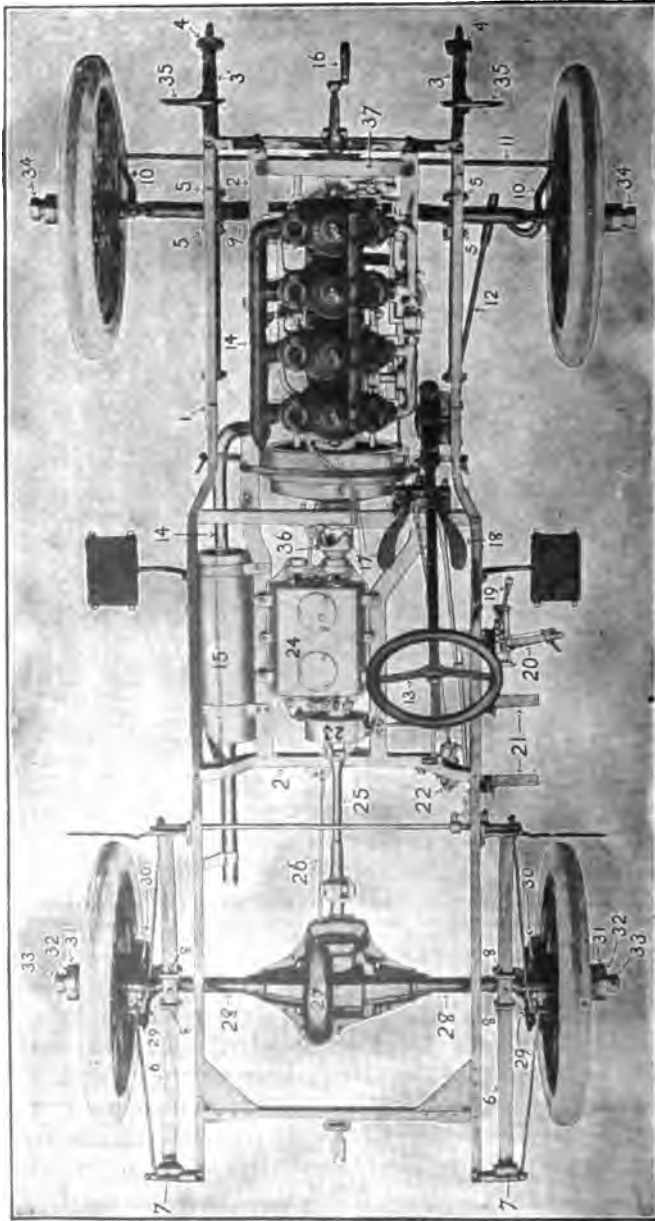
Chassis of the Peerless Four-cylinder Car, showing parts numbered: steel frame (1); motor and transmission frame (2); front springs (3); spring toggles (4); spring clips (5); rear springs (6); steering rod (12); steering wheel (13); exhaust pipe (14); muffler (15); starting crank (16); clutch pedal (17); brake pedal (18); gear pedal (19); gear shifting lever (19); brake lever (20); battery box hangers (21); interlocking device for gear shift, brake and clutch (22); foot brake band (23); transmission gear case (24); driving shaft (25); distance rod (26); differential case (27); rear axle tubes (28); brake drums (29); brake bands (30); hub clutch handle (31); hub clutch plunger (32); hub caps (33); front hub caps (34); lamp brackets (35); coupling on clutch shaft (36); cover for second-motion gears on motor (37).
